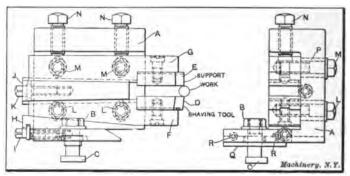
Shaving-tool Holder which can be used for a Wide Range of Work
